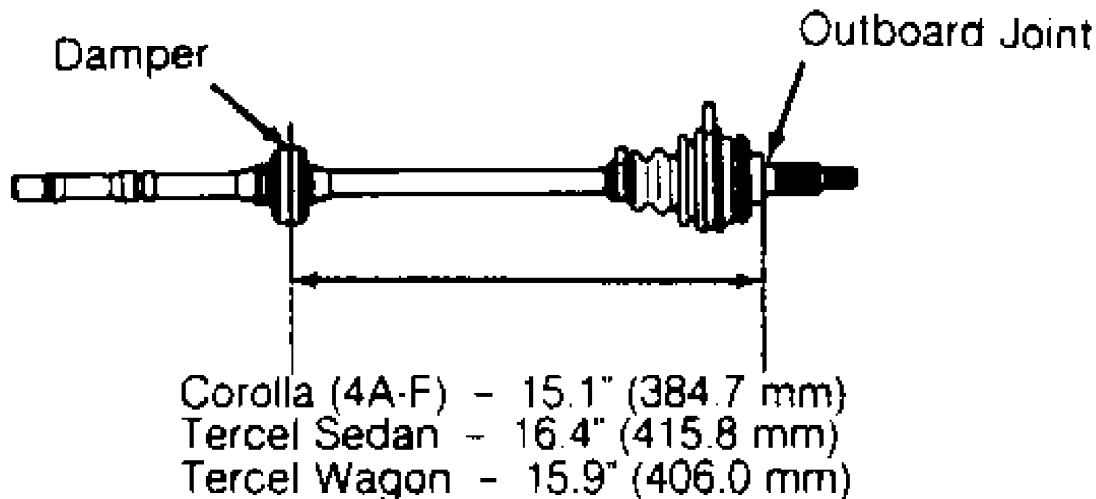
Locating Damper on Corolla (4A-F Engine) & Tercel
